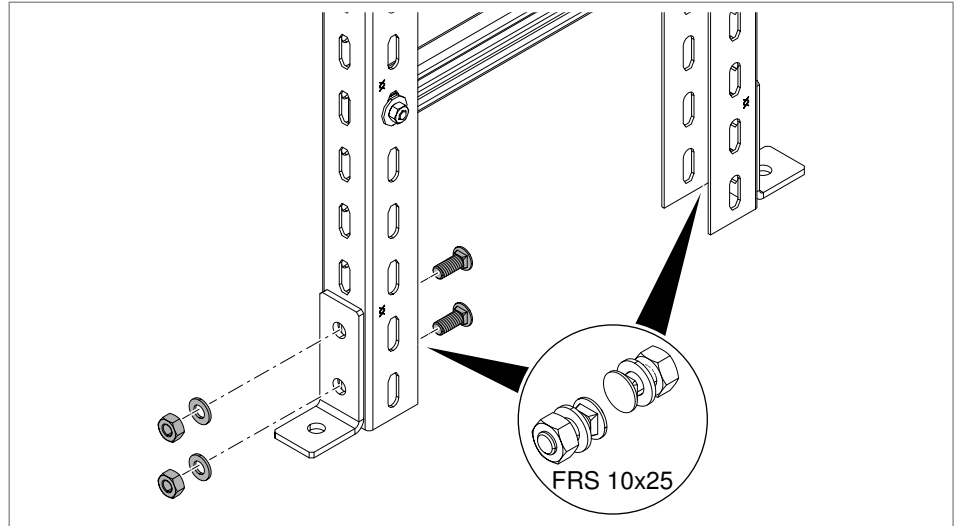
Fasten mounting bracket to vertical ladder SLM
